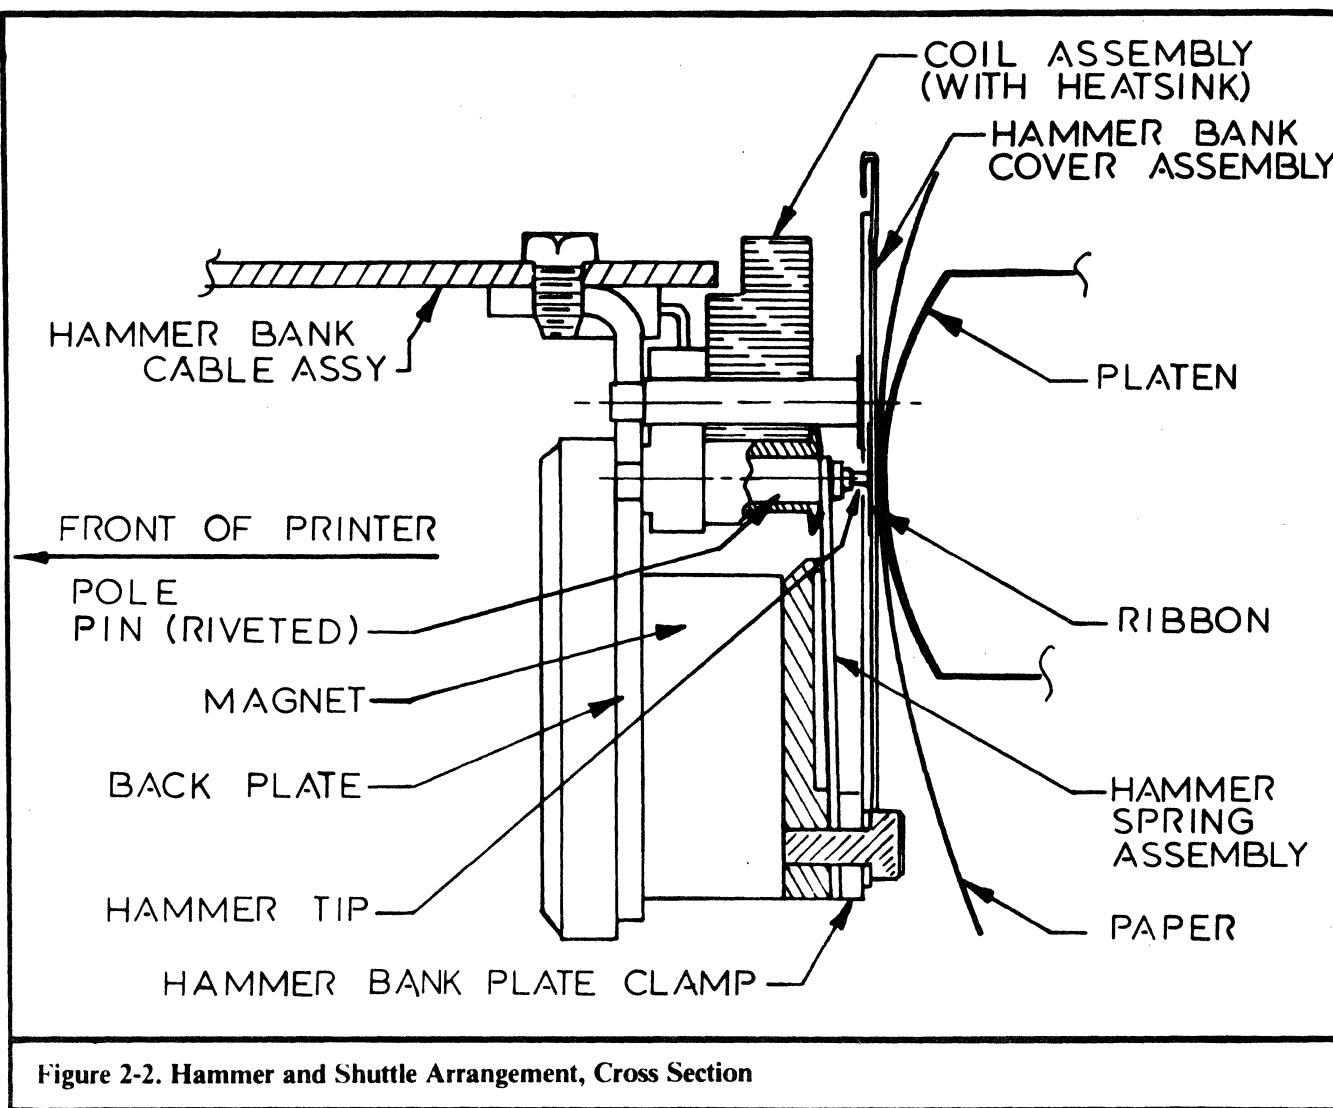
Hammer and Shuttle Arrangement, Cross Section
